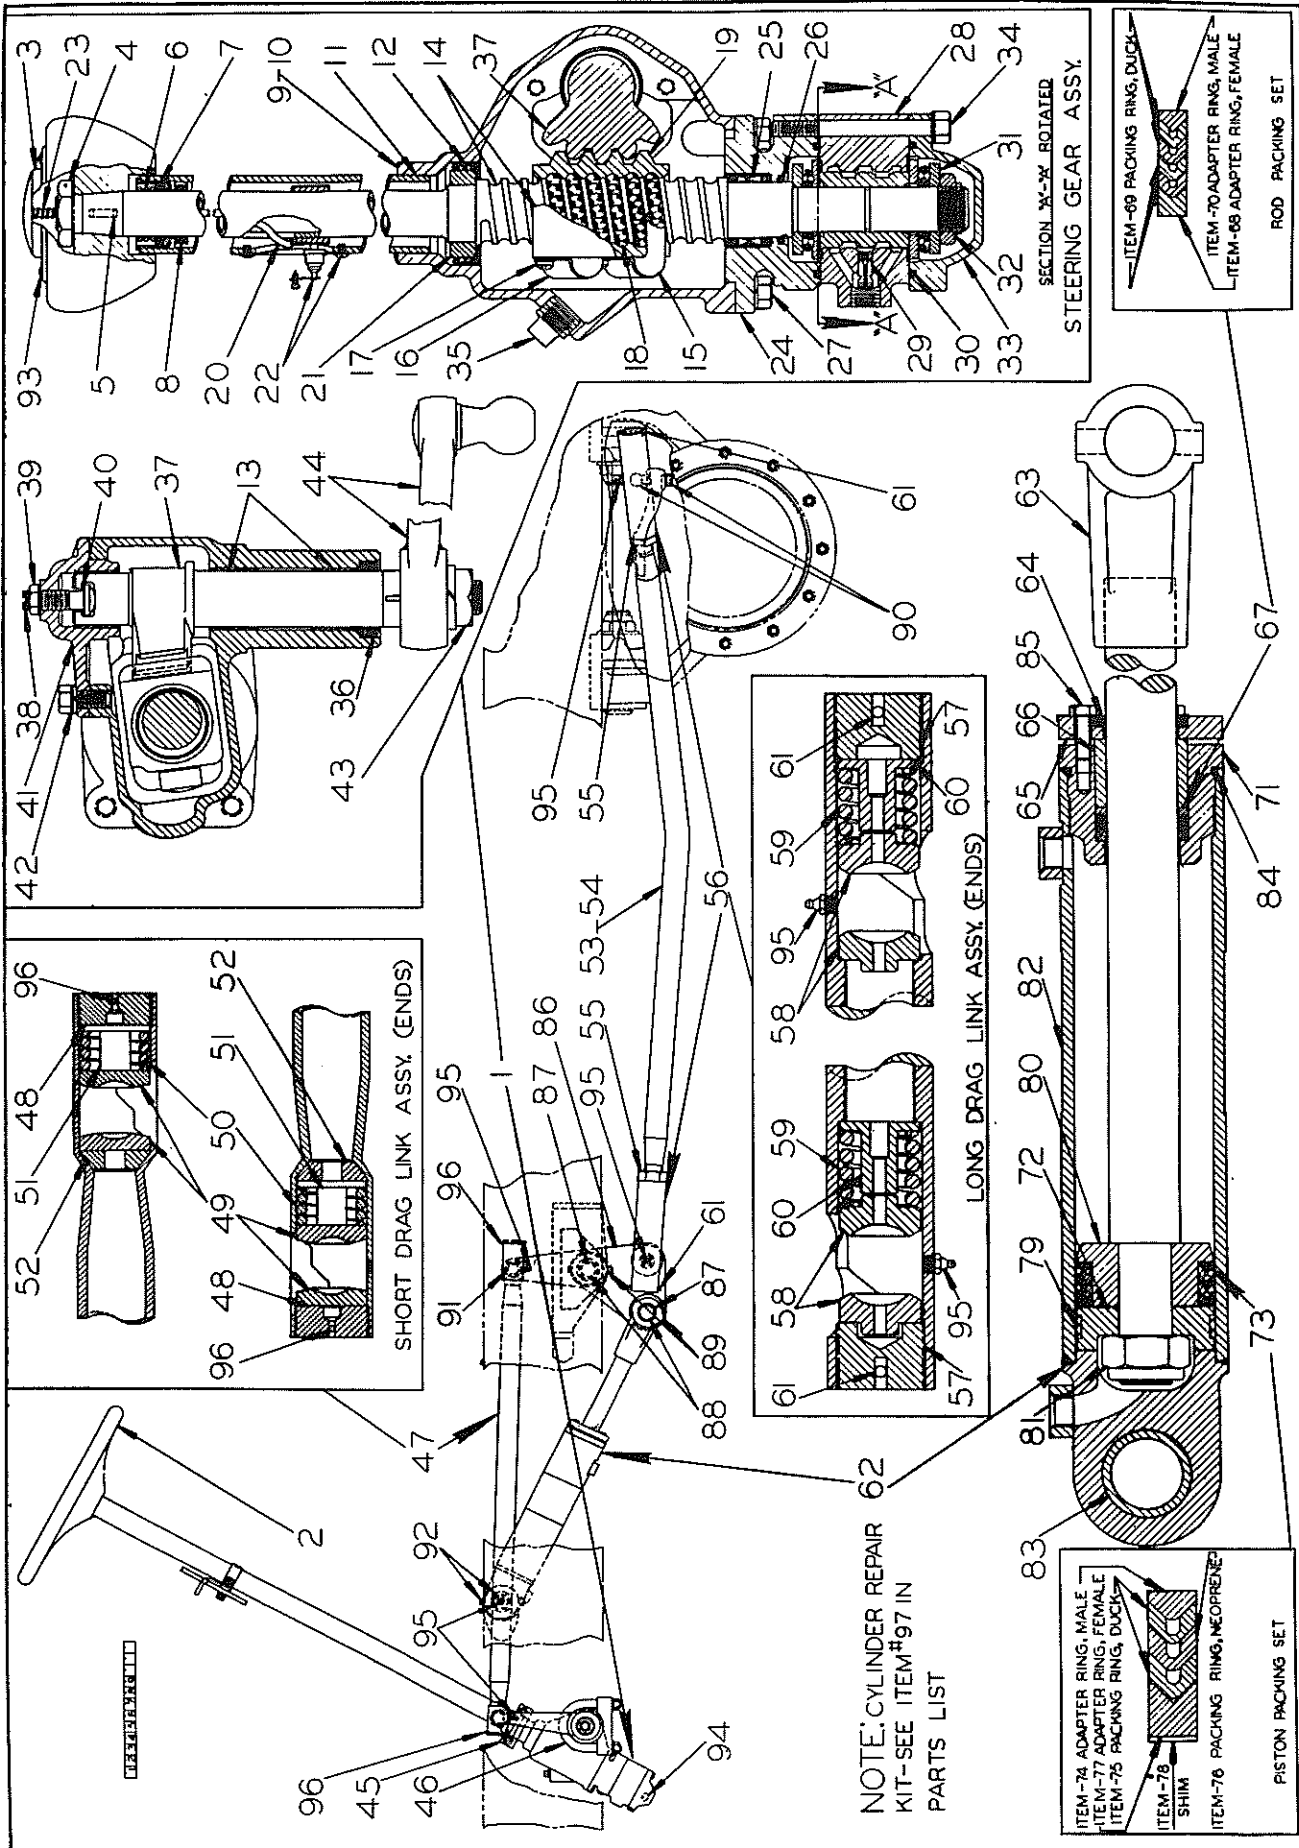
HYDRAULIC POWER STEERING GROUP
